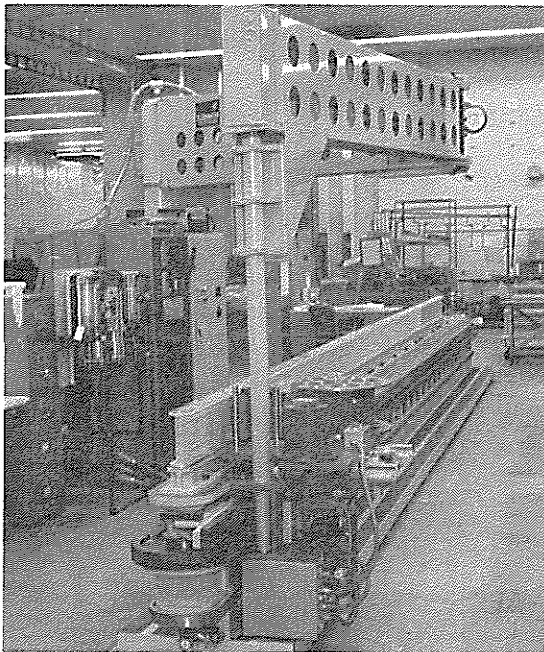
Spar Strap Layup on Production Automated Tape Layup Machine
